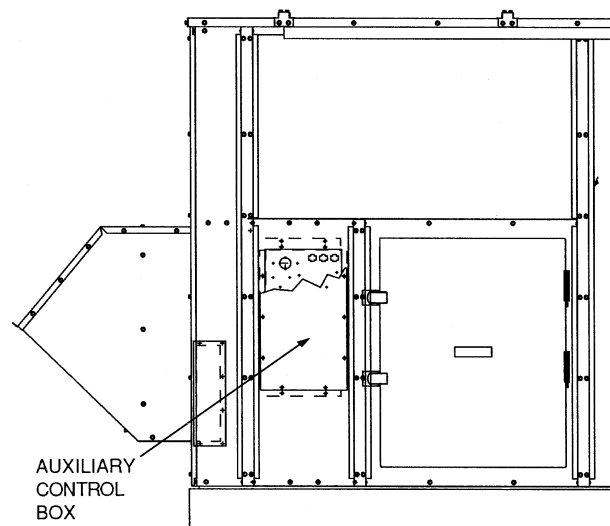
Auxiliary Control Box Location; Size 034-048 Units
